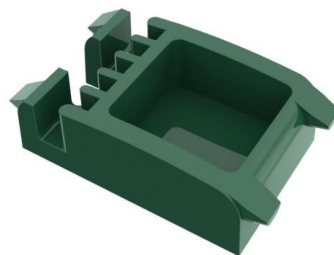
Fixator for 3D / 3D pro / 3D pro XL / 3D Multi / 3D Essential panels
